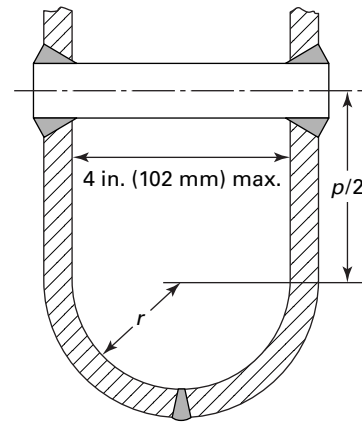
METHOD OF FORMING WATERLEG JOINTS BY WELDING
